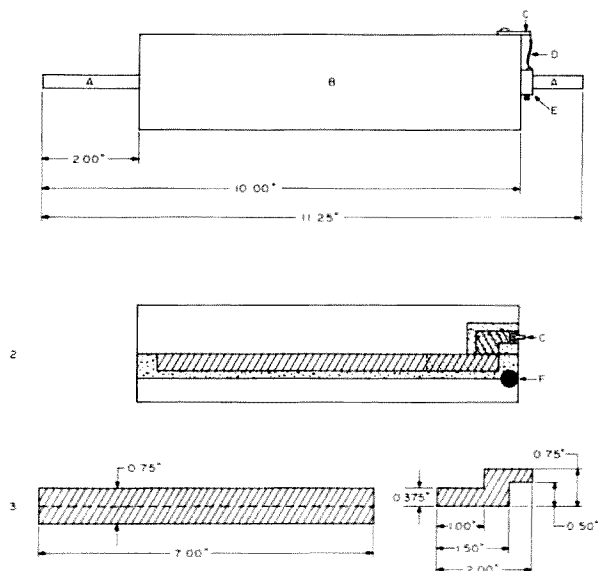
(1) General drum configuration. (A) 1/4" steel shaft. (B) Drum. (C) Small solder lug. (D) Piece of insulated hookup wire soldered to C and E. (E) Brass insert from a 1/4" control knob secured to the drum shaft with its set-screw. (2) Layout of aluminum foil strips (crosshatched) and transparent tape (stippled) on the drum. (F) is the small magnet attached to the drum surface with double-sided adhesive foam tape. (3) Dimensions of aluminum foil strips (see text for assembly).
